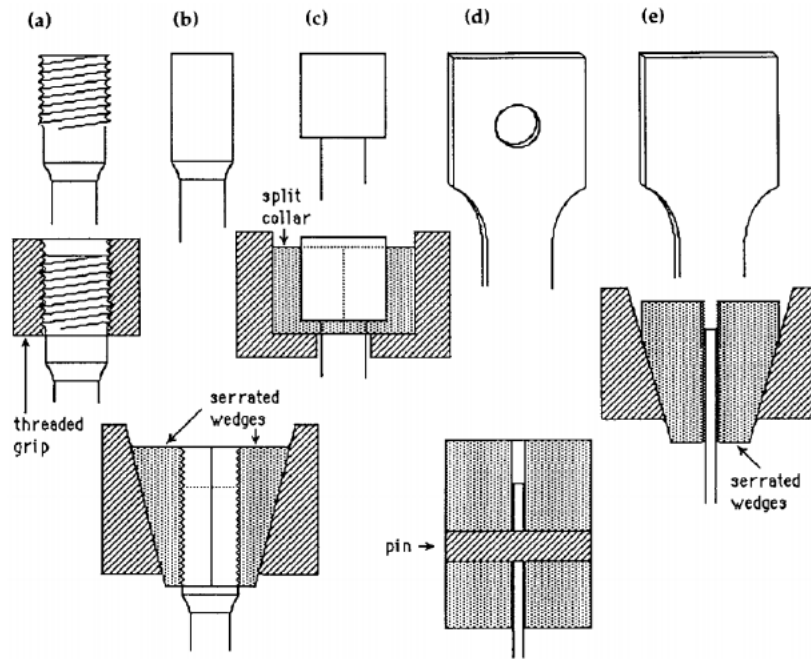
Systems for gripping tensile specimens. For round specimens, these include threaded grips (a), serrated wedges (b), and for butt end specimens, split collars constrained by a solid collar (c). Flat specimens may be gripped with pins (d) or serrated wedges (e) (Tensile testing, 2004).
